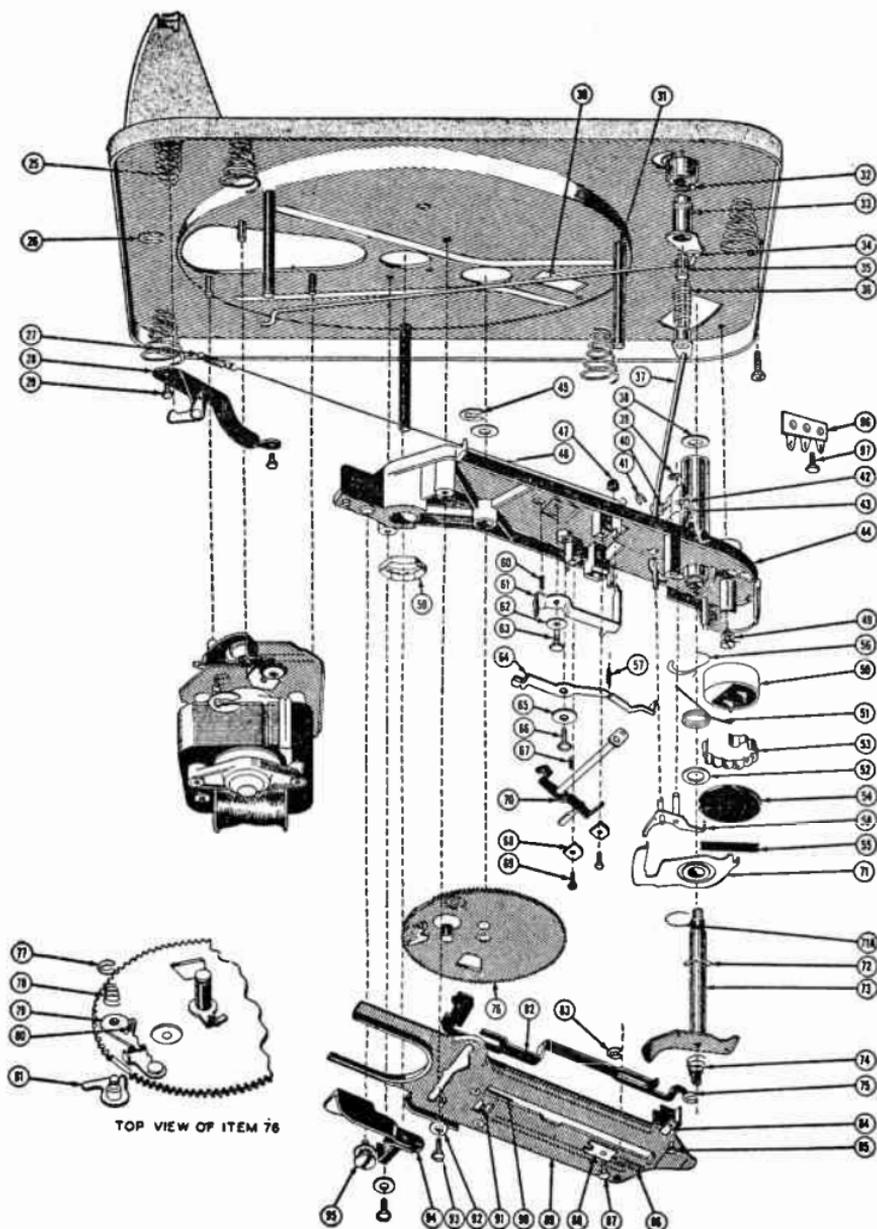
Exploded view of parts below baseplate in V-M automatic three-speed record changer.
